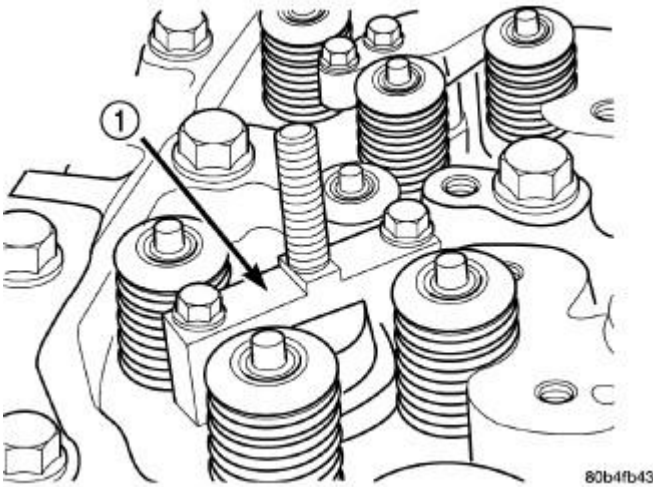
Spring Compressor Mounting Base-Part Of Tool 8319
